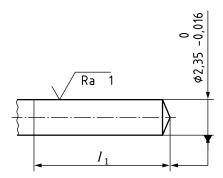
Dimensions, tolerances and surface roughness for Type 2 shank
